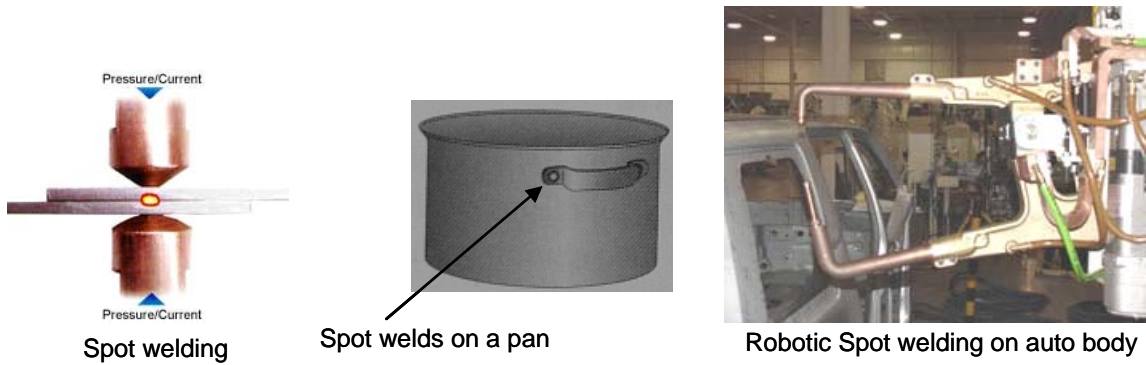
(a) Spot welding (b) and (c) Examples of resistance welding
